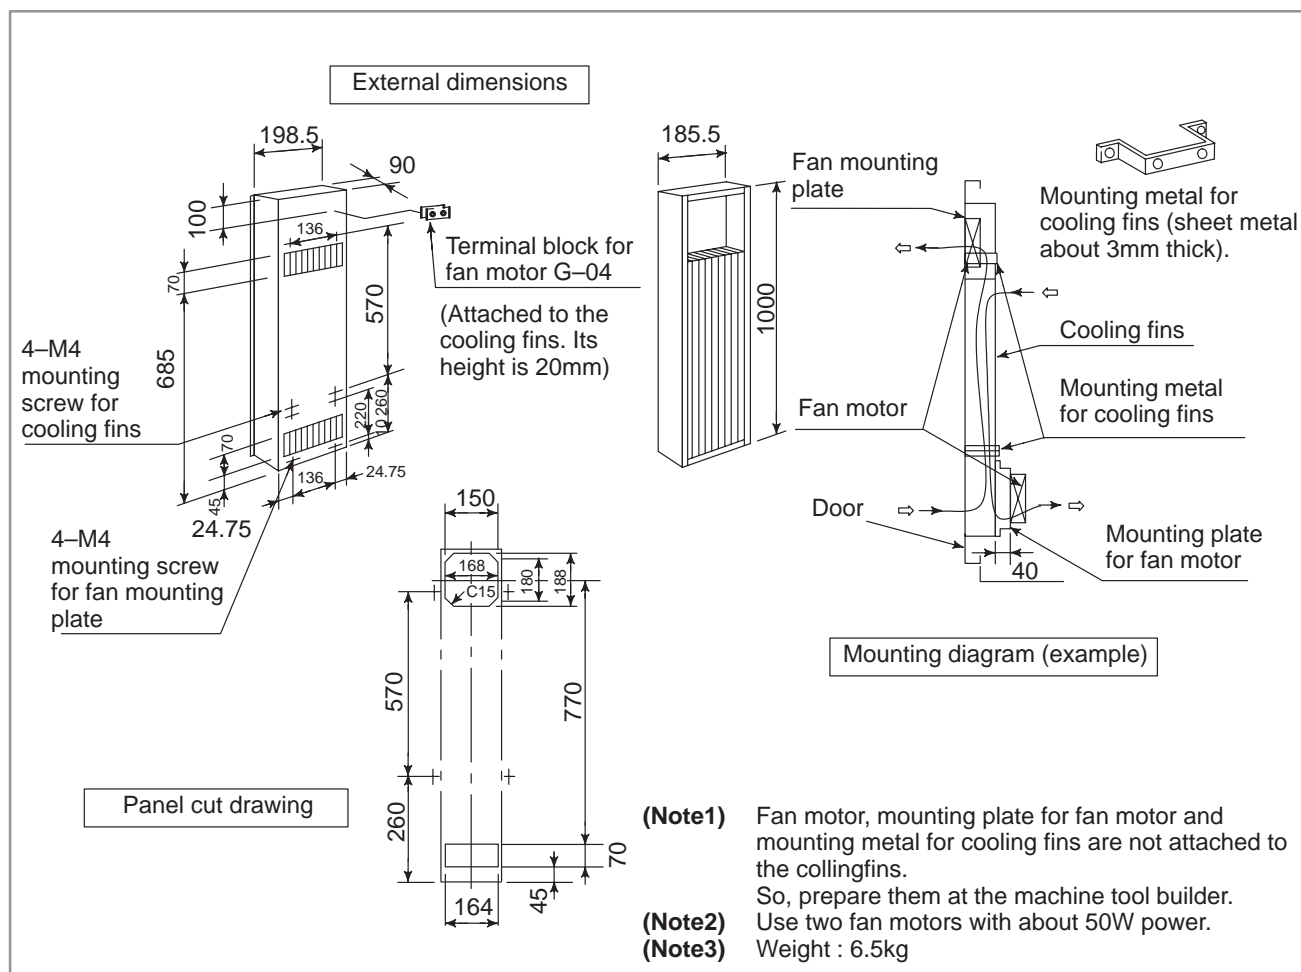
(b) External dimension and mounting method of cooling fin A (02B-0053-K303)
